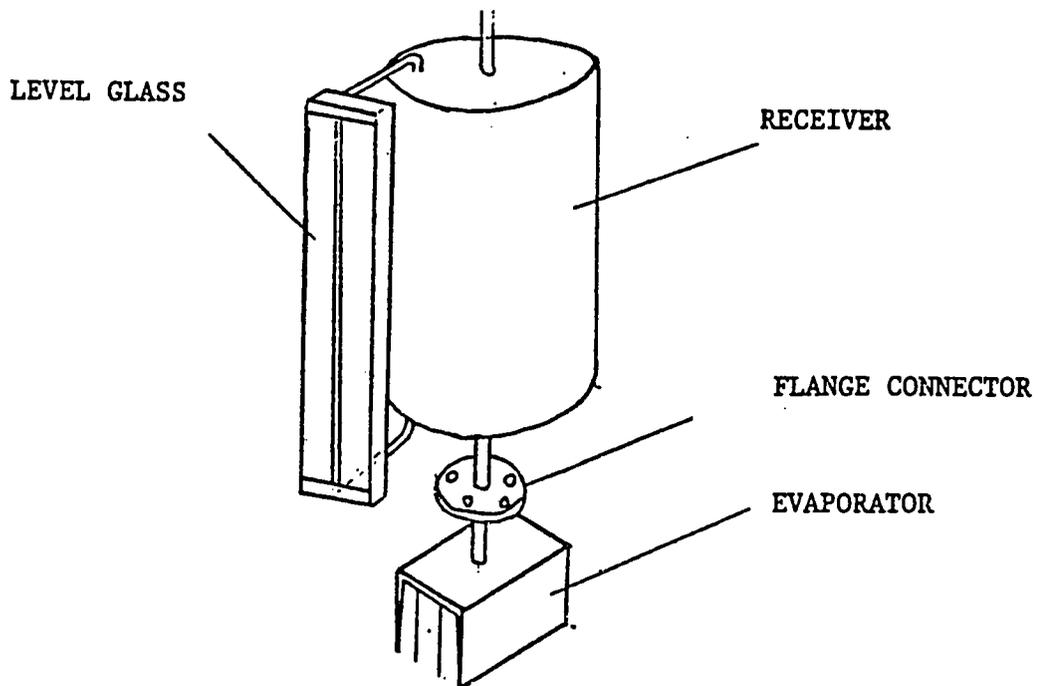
RECEIVER/EVAPORATOR ASSEMBLY.
